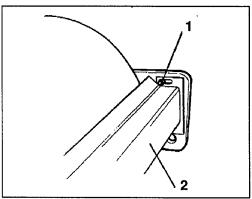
Front scraper 1 Fastening bolts 2 Scraper
